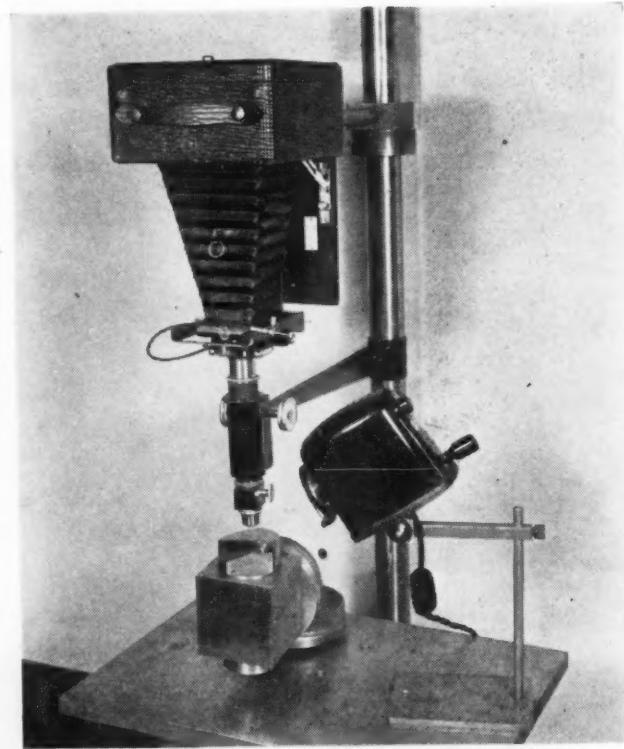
SETUP FOR TAKING PHOTOMICROGRAPHS OF CUTTERS
